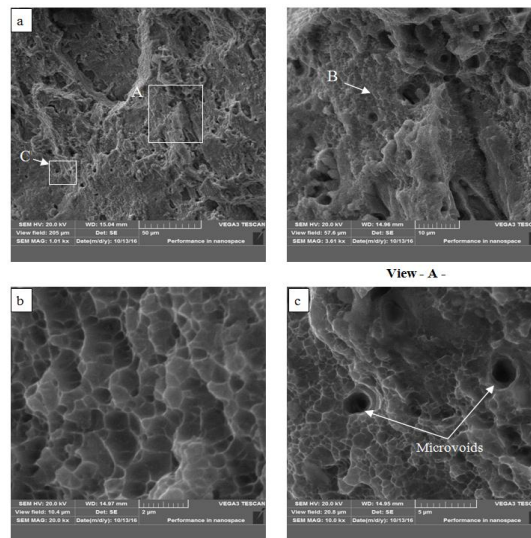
Scanning electron micrographs of base material AA2024-T3 aluminum alloy sheet after tensile testing, (a) Overview of fractured surface, (b) Magnified view of region B marked in view -A- , (c) Magnified view of region C marked in (a) showing equiaxed dimples and microvoids
